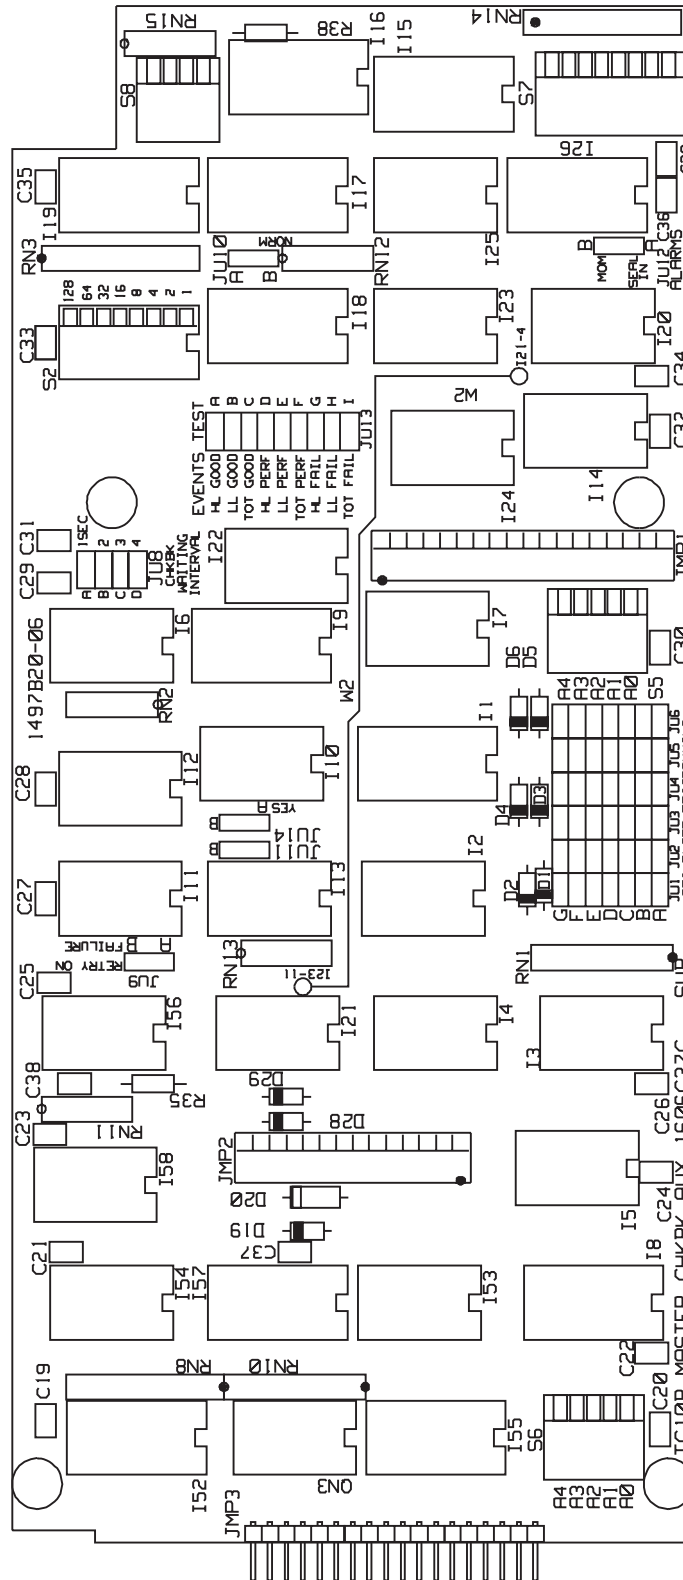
Automatic Checkback PC Boards — Master Auxiliary Board. (1497B20)
